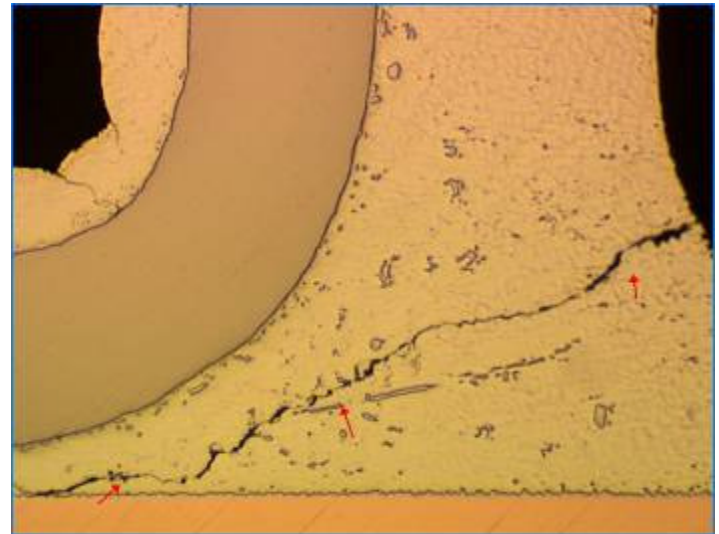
cross section, SN64, U62, left lead solder crack, 200xb
